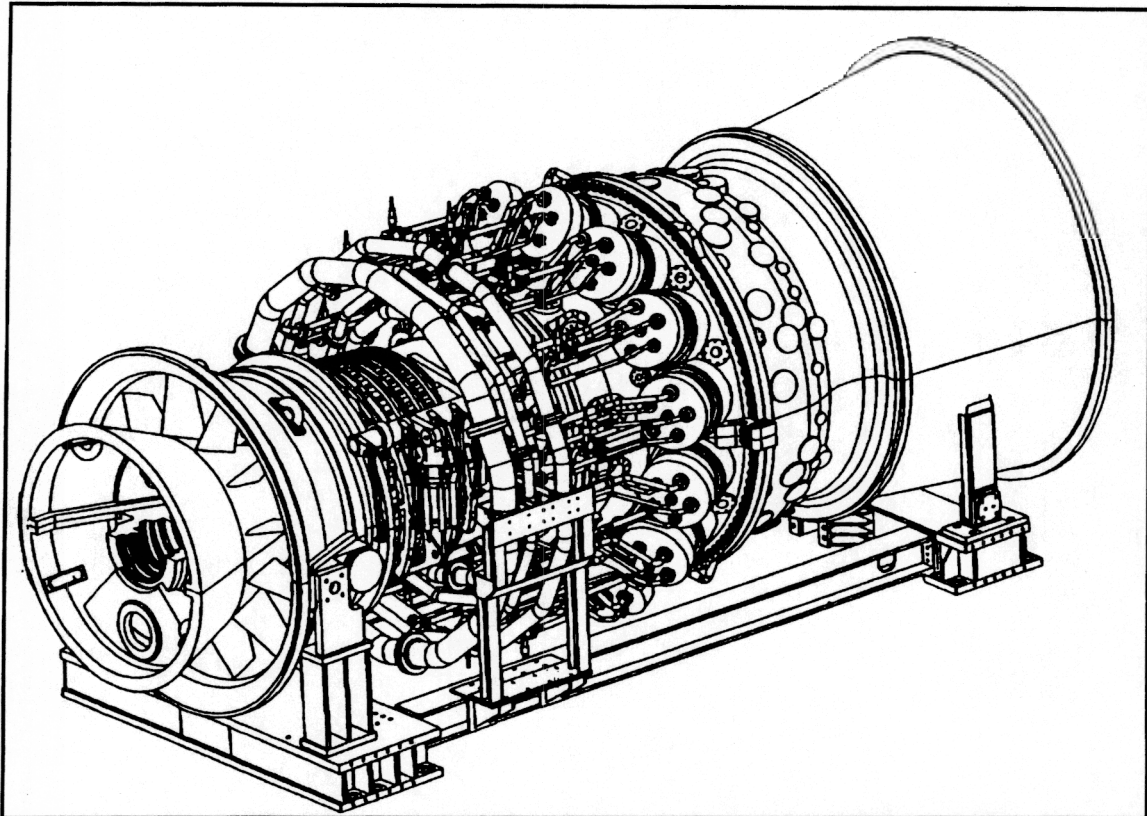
An Isometric Drawing of the ATS Gas Turbine
